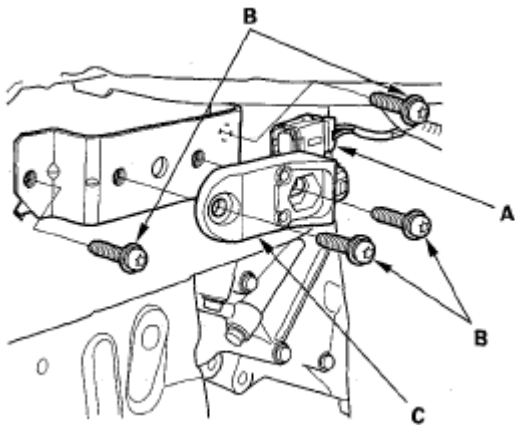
Identifying Engine Compartment Wire Harness 2P Connector And Front Impact Sensor Torx Bolts
